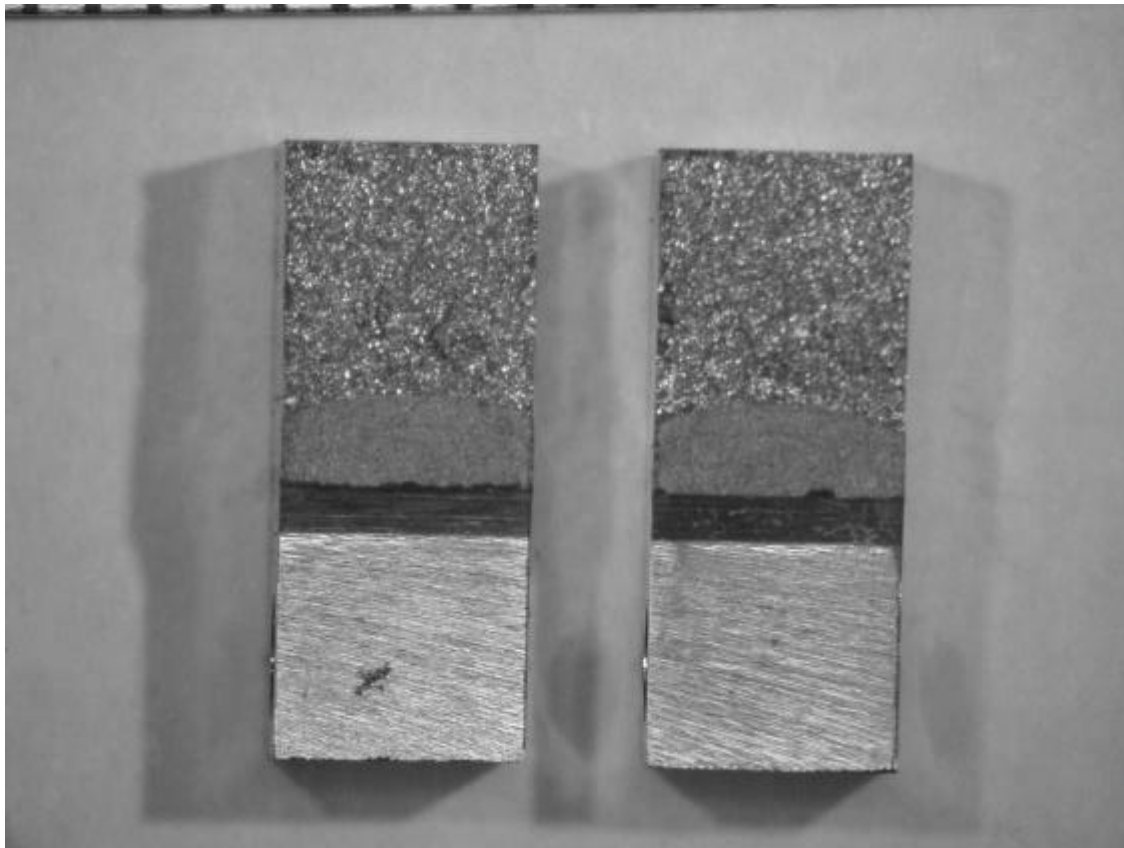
Fracture surface of the specimen X5D2A after testing.
